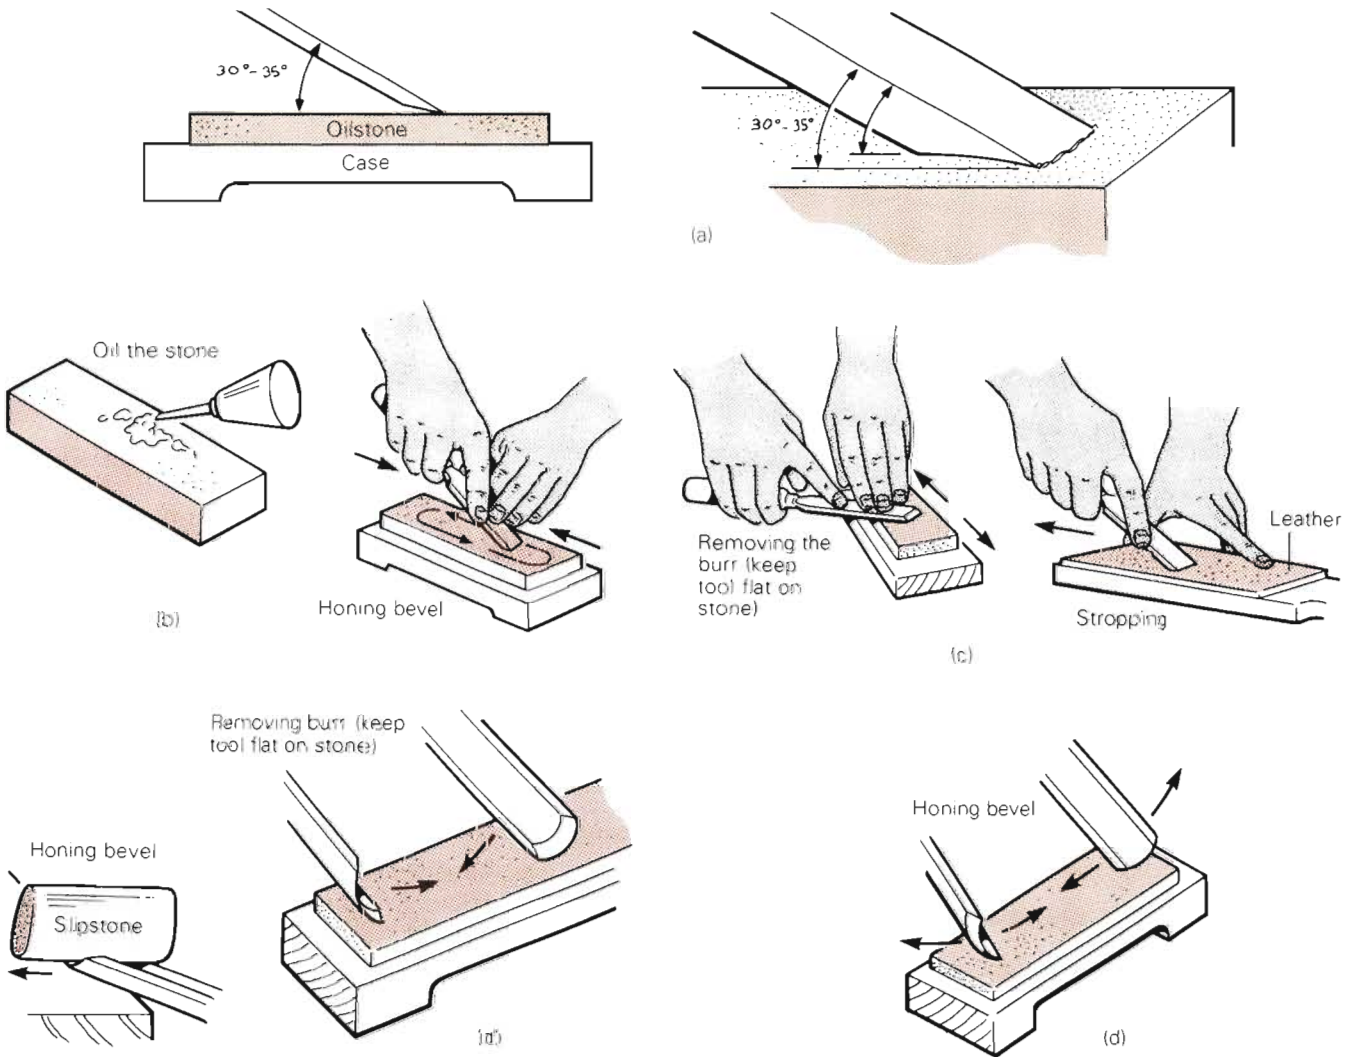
Sharpening chisels and gouges: (a) sharpening angle, (b) sharpening process, (c) sharpening a scribing gouge, (d) sharpening a carving gouge.
